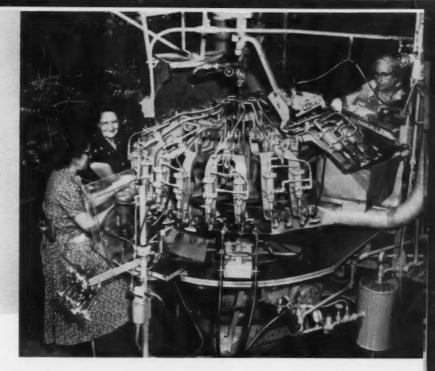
(Left) Second operator on radiator pressure cap assembly machine places a vacuum release valve on each assembly. The valve is secured by rivets.
